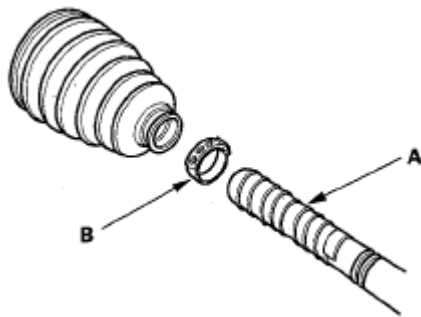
Identifying Driveshaft Splines Wrapped With Vinyl Tape
